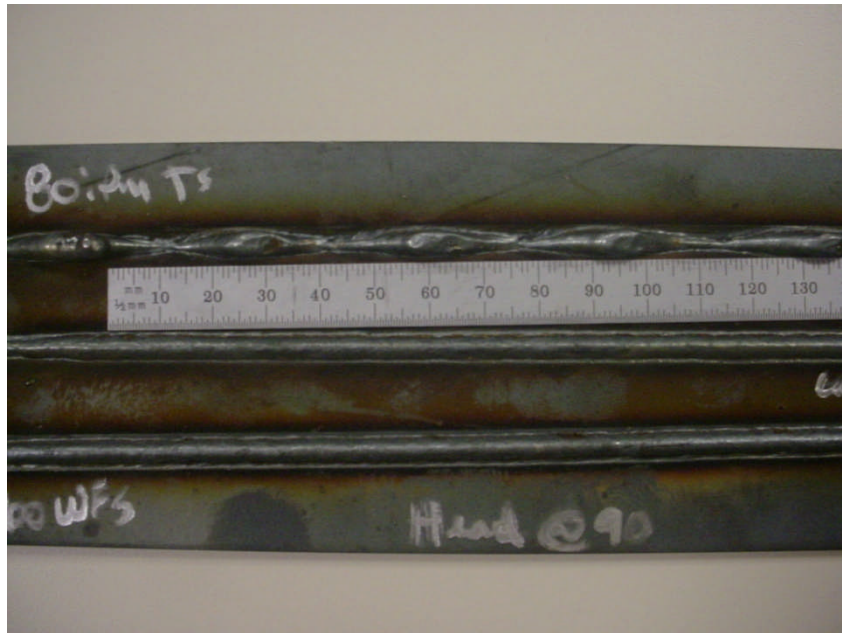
Classic Bead Humping (top weld bead) Suppressed with 1-kW Nd:YAG Laser Energy (WFS/TS of 5 - BOP weld) at 2.0-m/min TS
